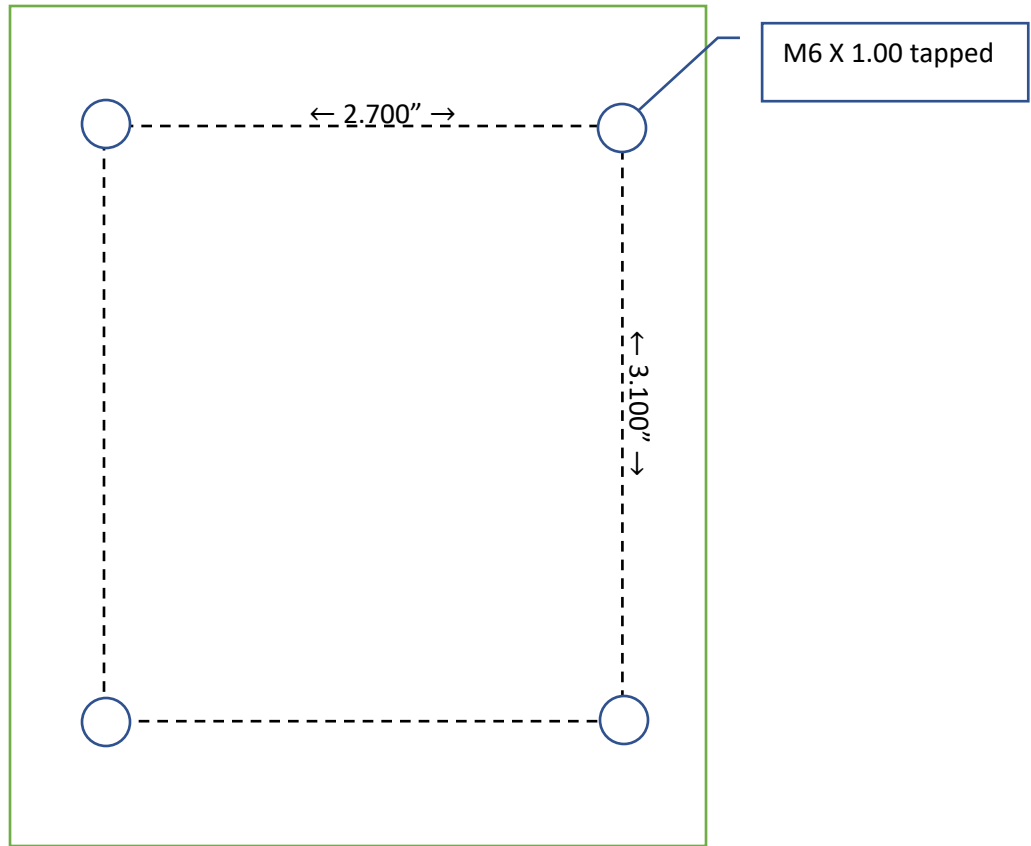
Mounting pattern for the Pellet Extruder. 4 M6 X 1.00 tapped holes.
